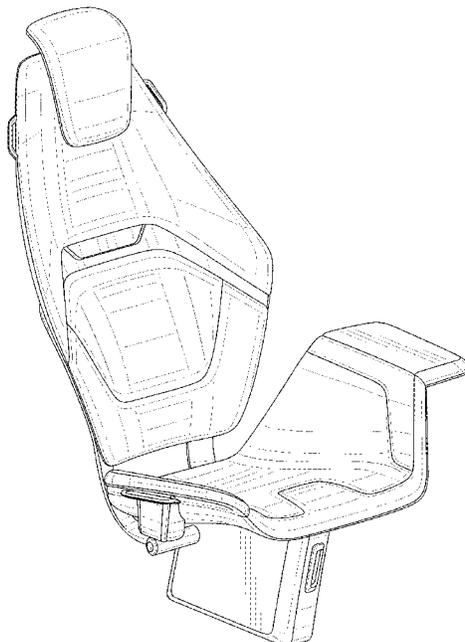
is a perspective view showing our new design of a cockpit crew seating;
